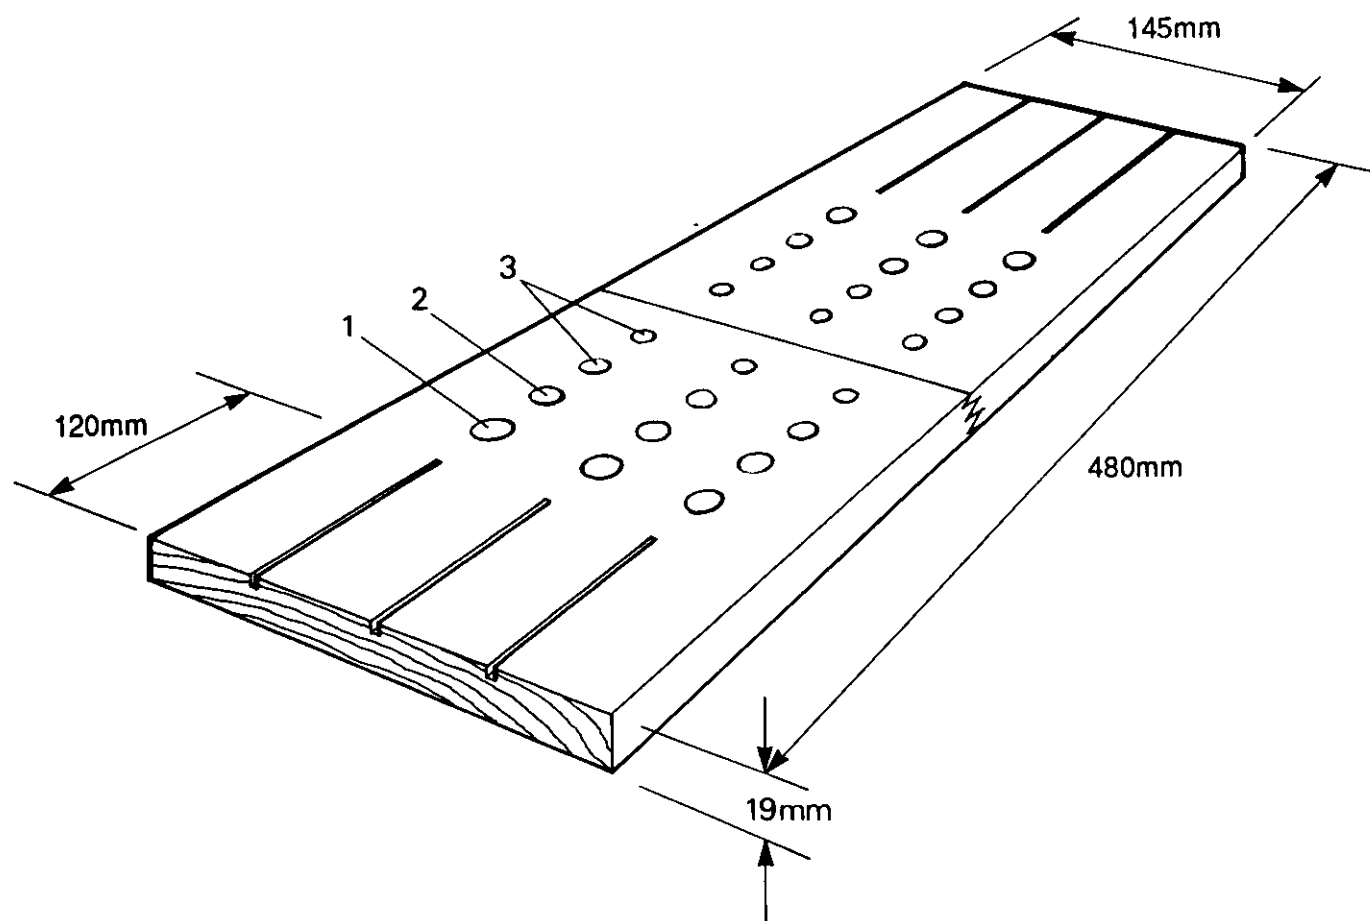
Finger jointed timber panels used for outdoor exposure of fillers (slot depth 10 mm, width 3mm; hole 1 diameter 12mm, depth 8mm; hole 2 diameter 9mm, depth 4mm; hole 3 diameter 3.8mm, depth 2-3mm).
